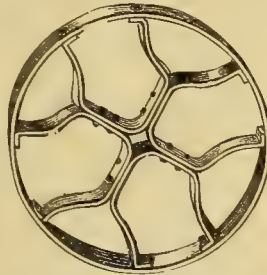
WROUGHT IRON WHEEL FOR WHEELBARROW.
